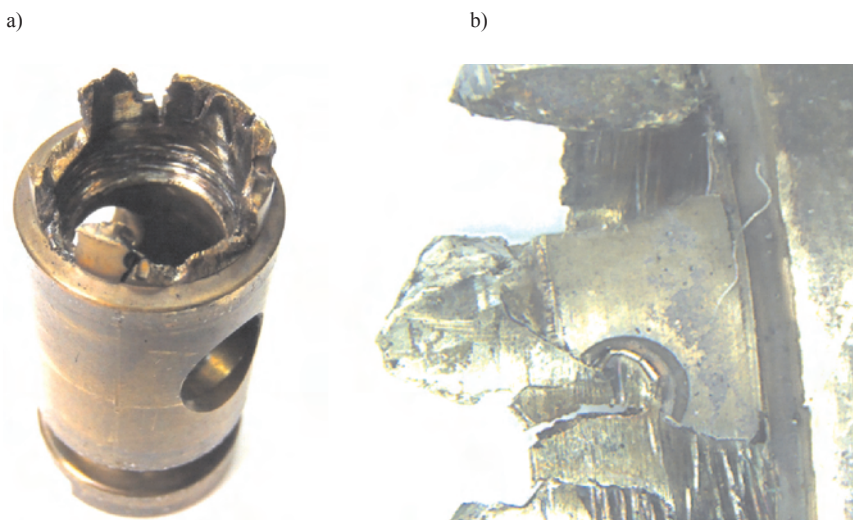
Damaged transverse bearing: a) scale 2:1, b) scale 10:1
